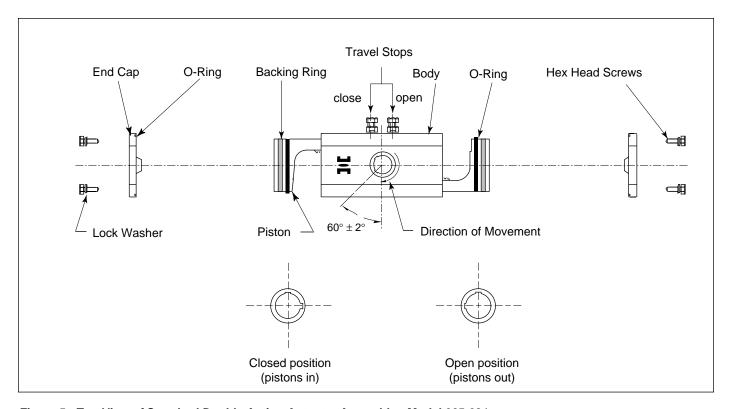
Top View of Standard Double Acting Actuator Assembly - Model 065-091
